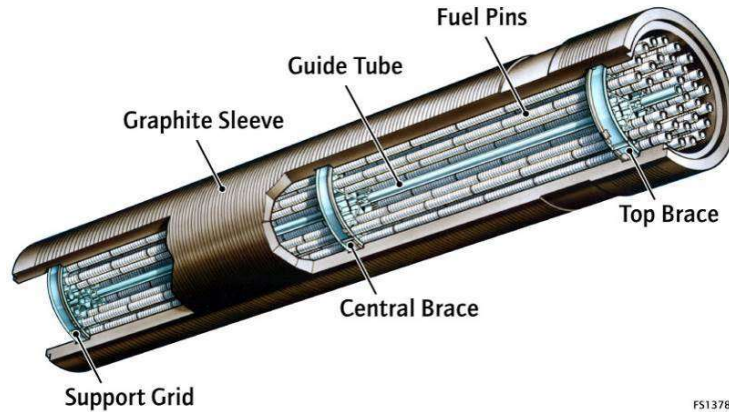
AGR fuel assembly (figure courtesy of Sellafield Ltd.).
